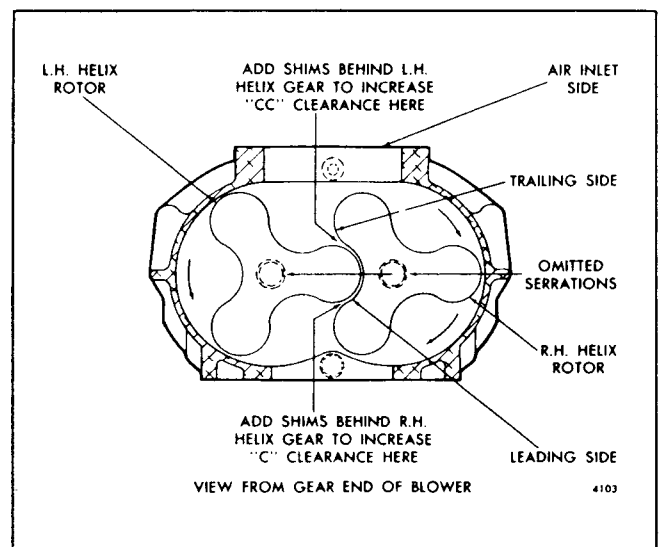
Diagram Showing Proper Location of Shims for Correct Rotor Lobe Clearances
